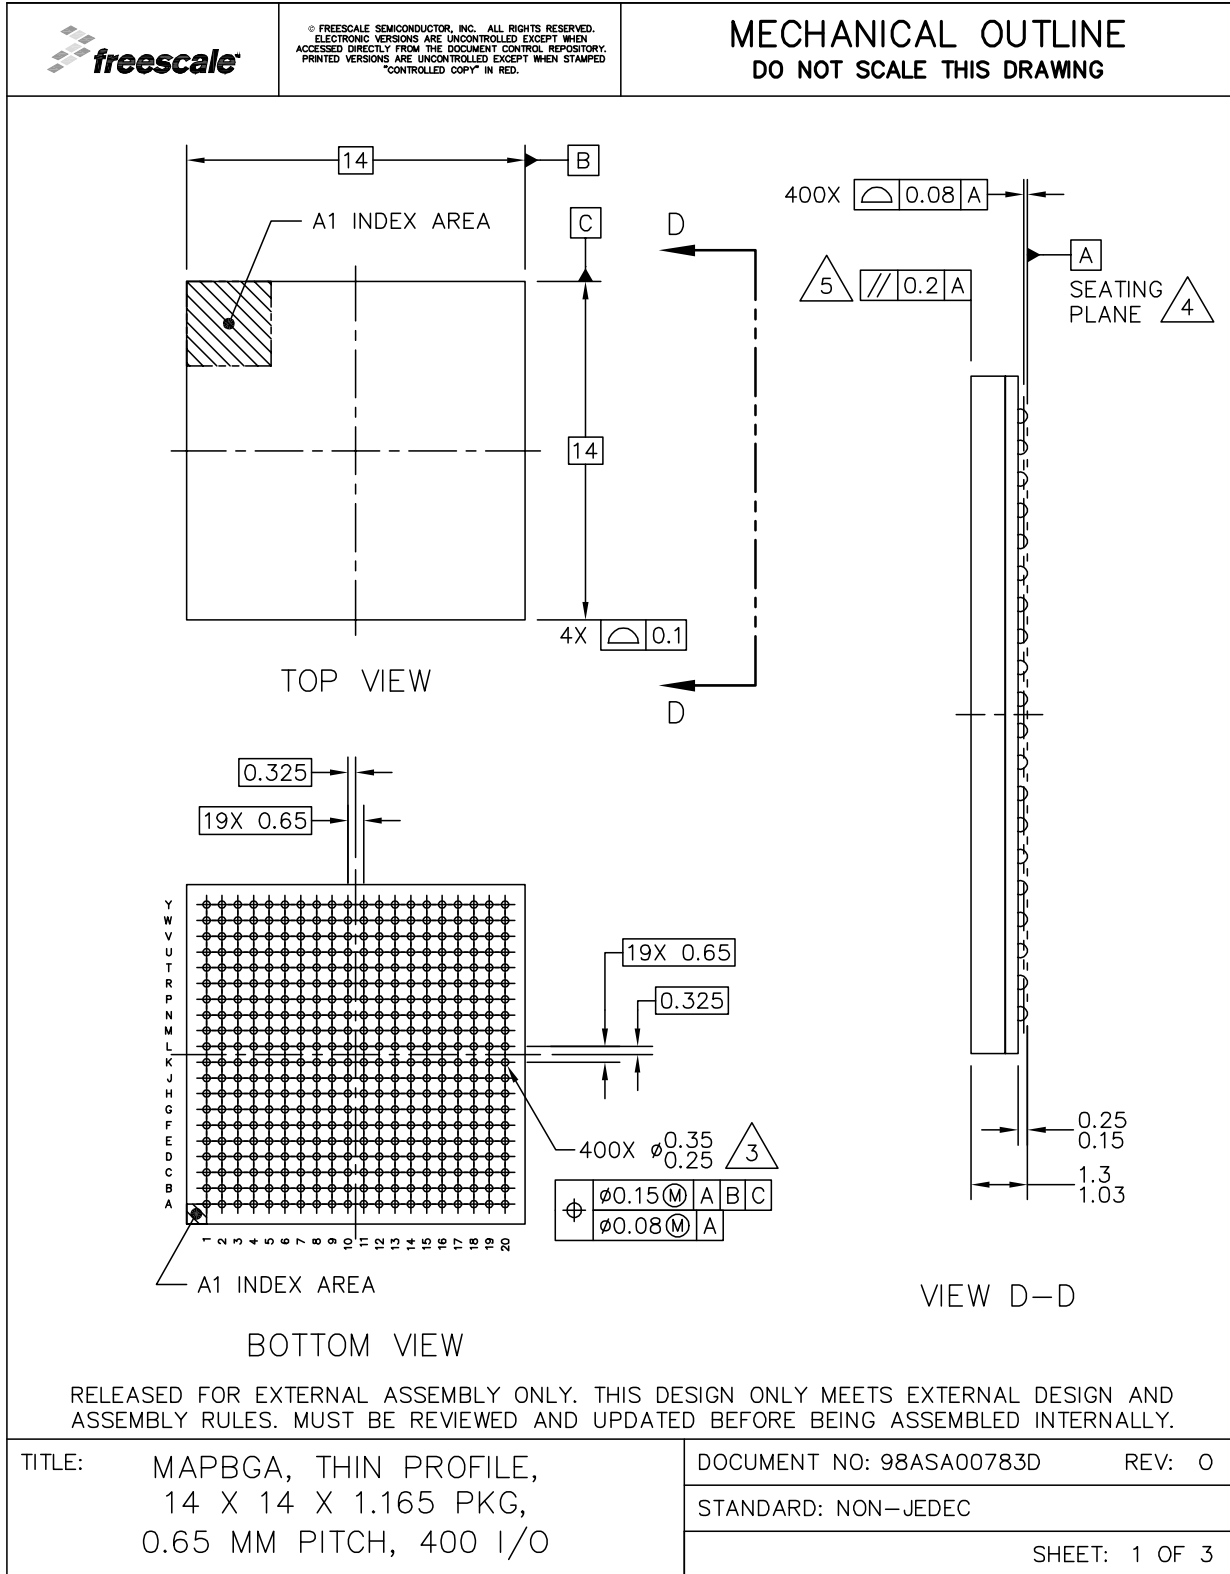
14x14 mm BGA, Case x Package Top, Bottom, and Side Views
